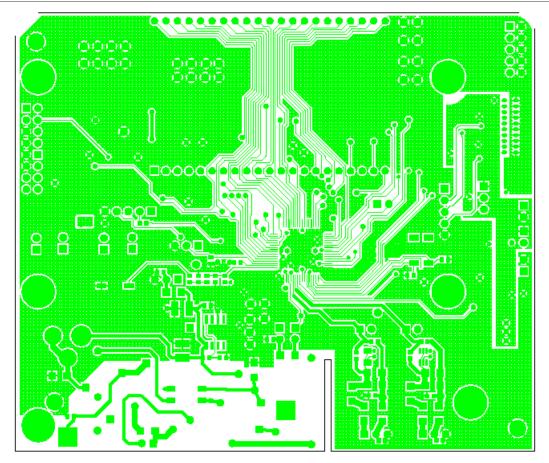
71M6511 2-Layer Demo Board (Xformer Power Supply): Top Copper View
